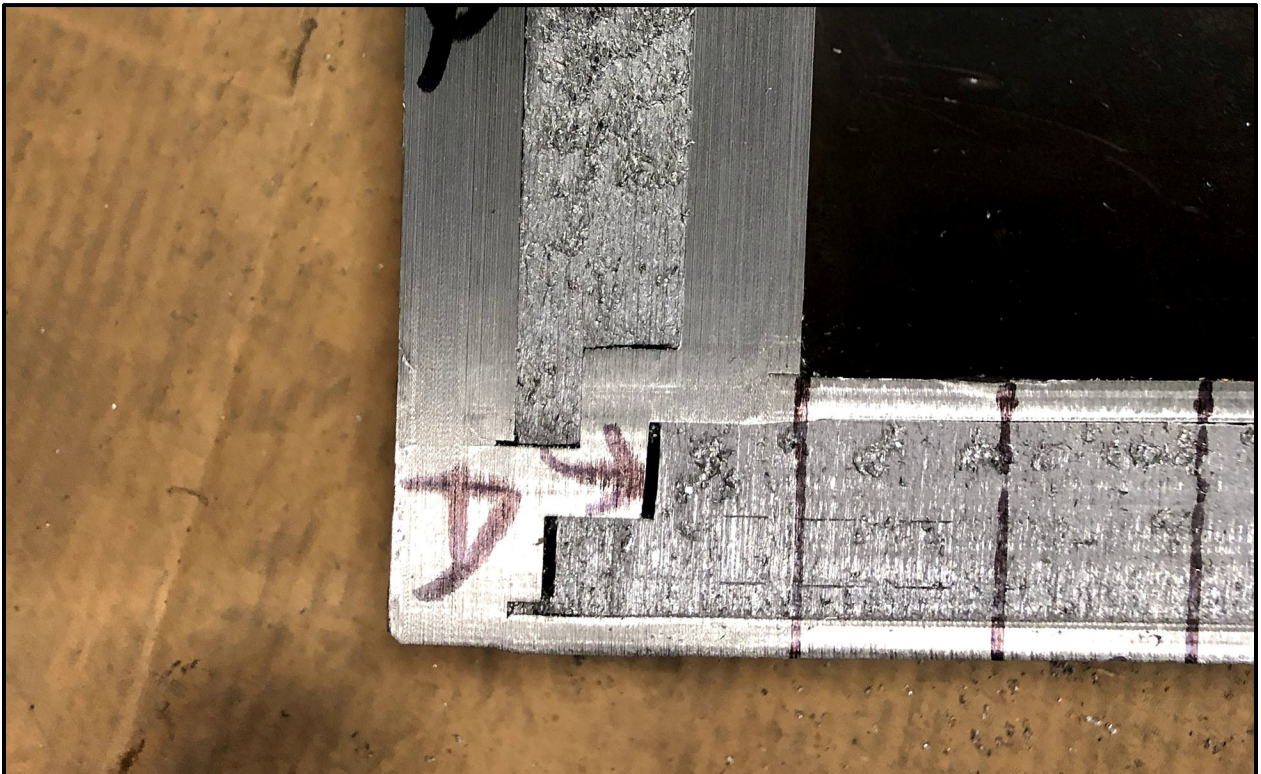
SC-30G2 18TU-02 Destructive Disassembly Cut A at Lower Flange
